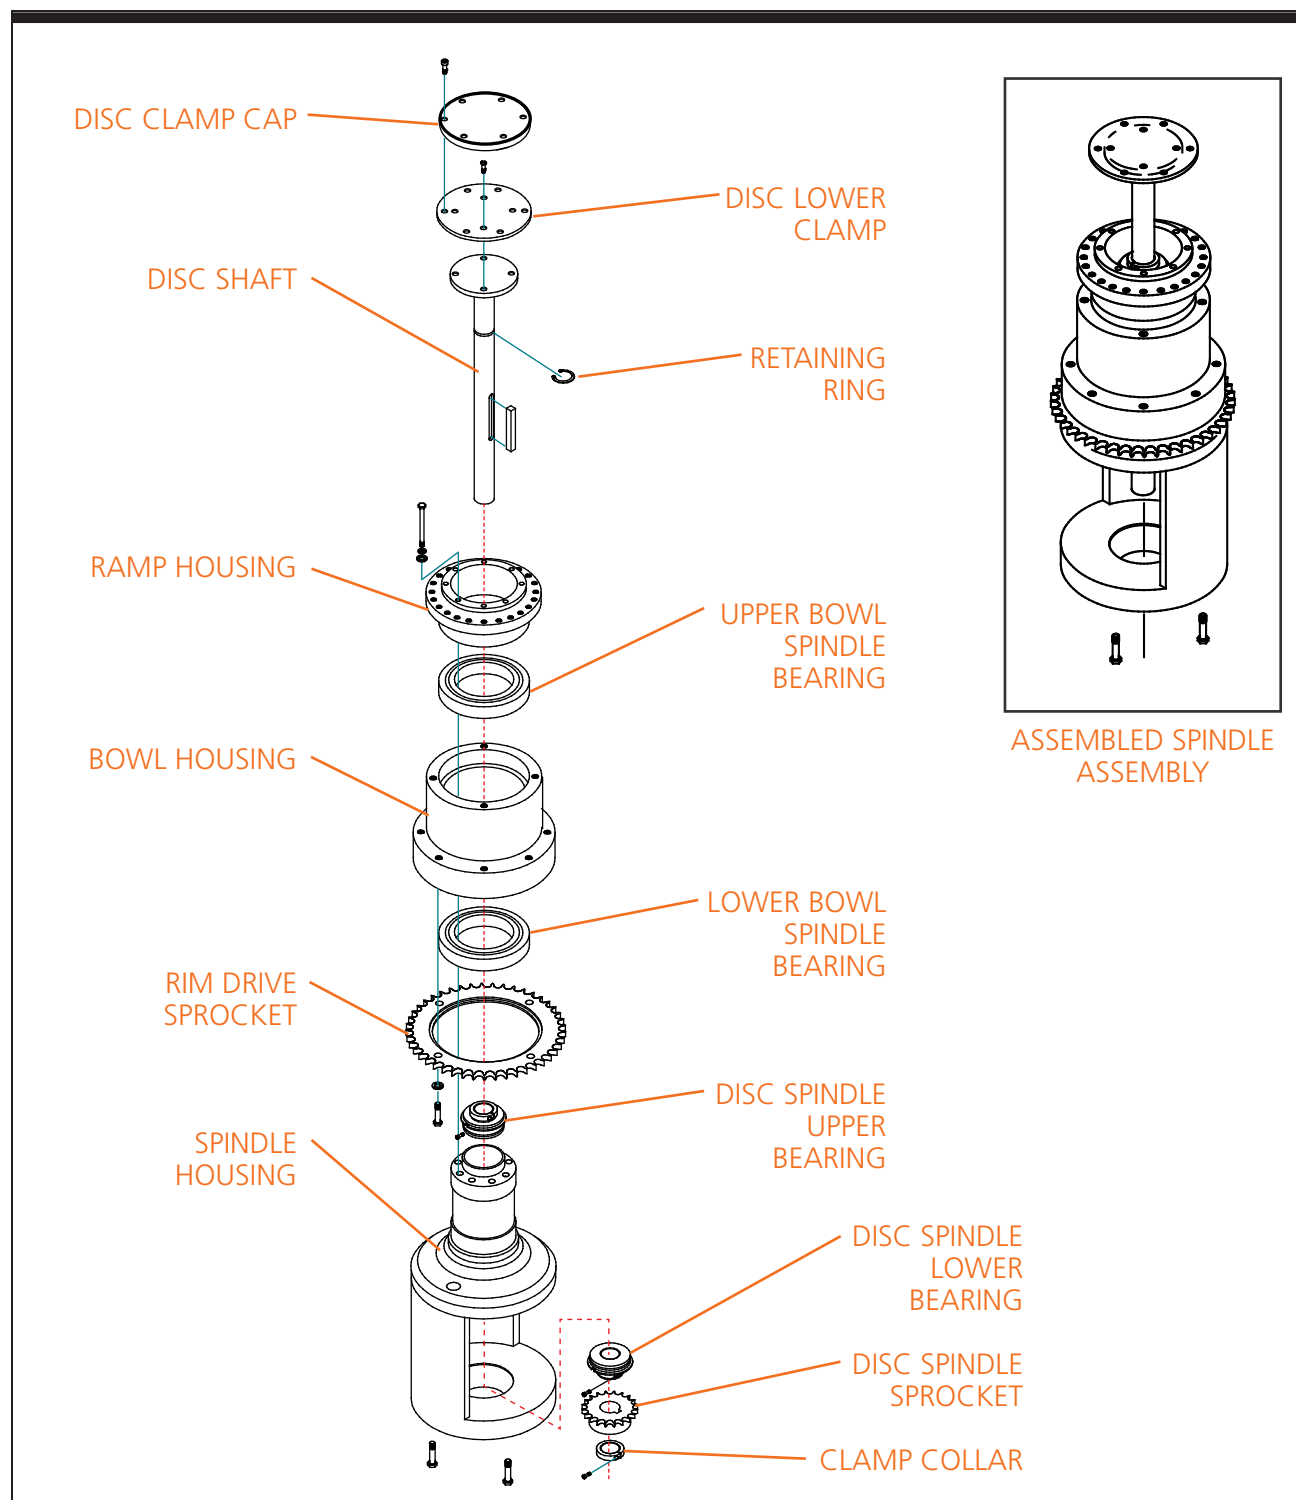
FT-40/FT-50 Spindle Assembly - Exploded View
